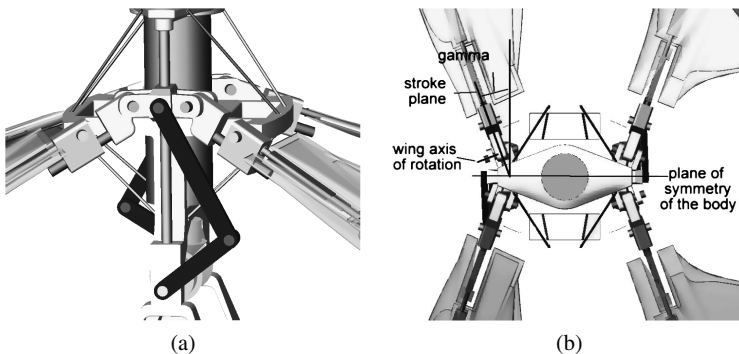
Double slider–crank mechanism. (a) Front view. (b) Bird's eye view.
